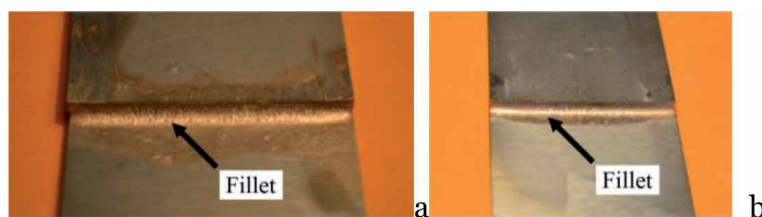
The appearance of the brazed sample of molybdenum-stainless steel, produced using Cu-Mn-Ni-Fe-1Si brazing filler metal: direct (a); reverse (b) fillet.
